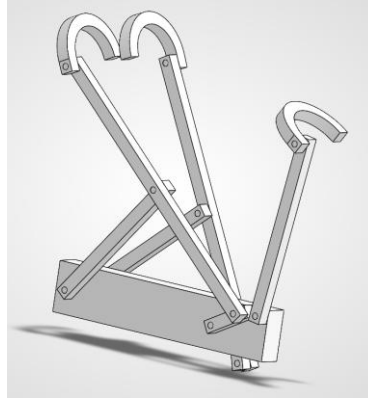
CAD model of initial design previously depicted above in Figure 2.1.a.
